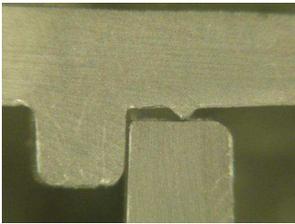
A cross-section of a 90° ED on an ISTE P part prior to welding.
